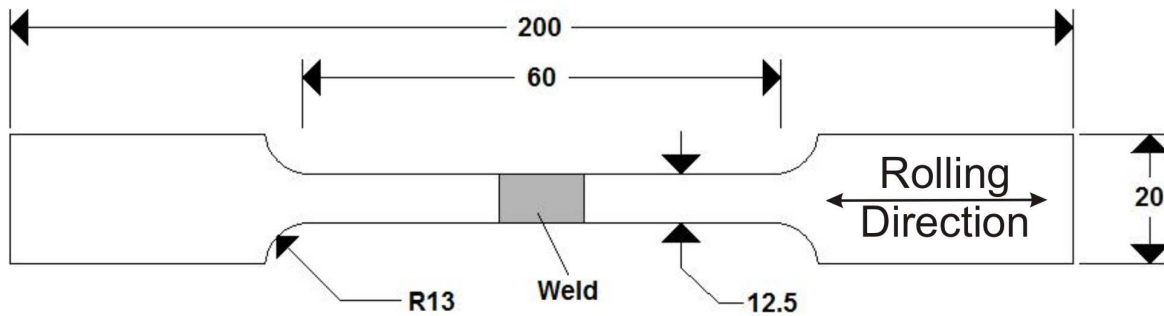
The dimensions for the transverse welded tensile specimens as specified by ASTM E 8-04M [50]. All dimensions are in millimetres (mm).
